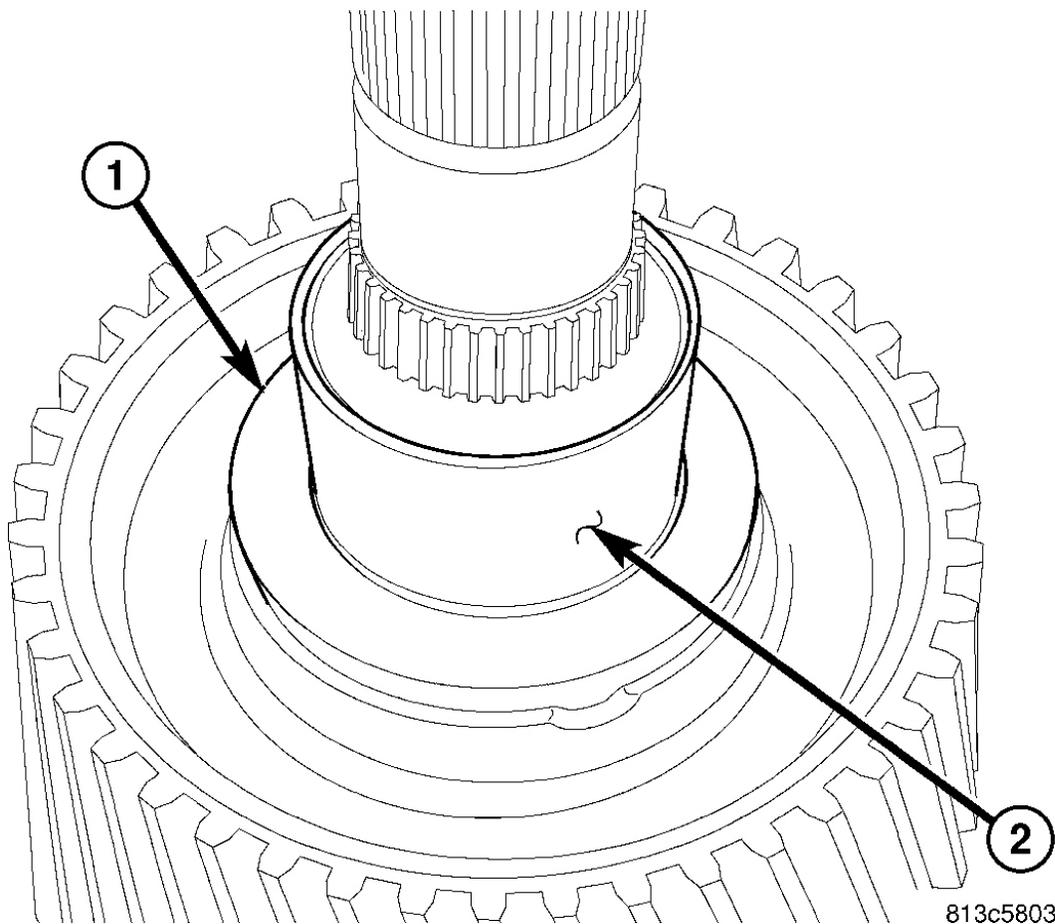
First Gear Thrust Washer & Reverse Gear Bearing Race
